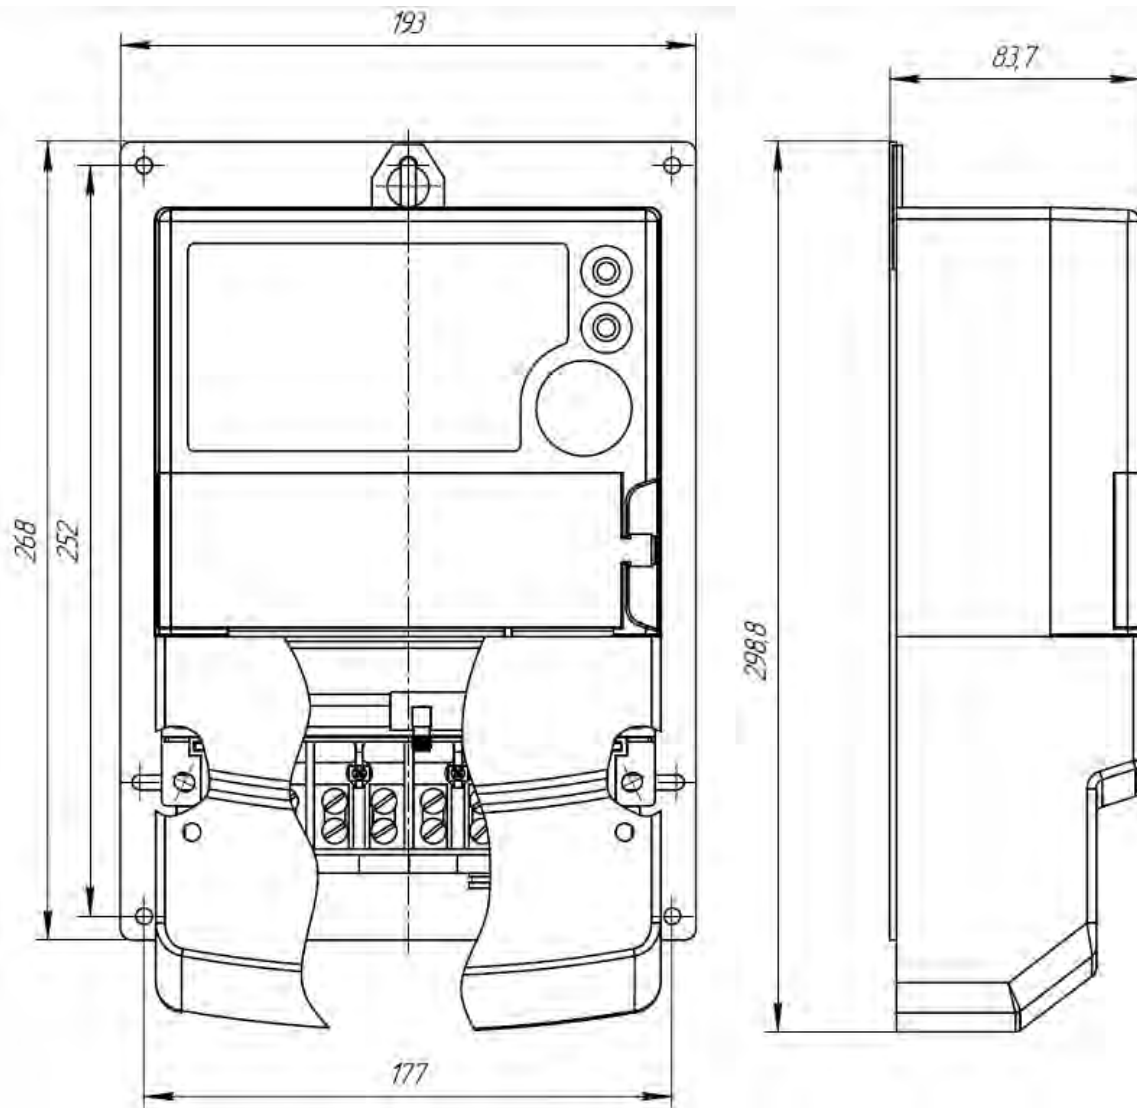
Overall and mounting dimensions of the meter installed on the mounting board
